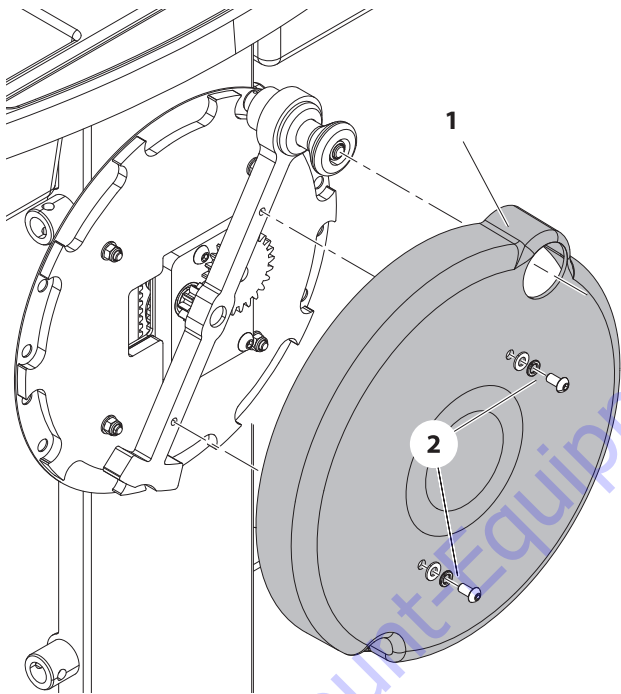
Flywheel Crank Cover Installation - Ecolift50 and 70
